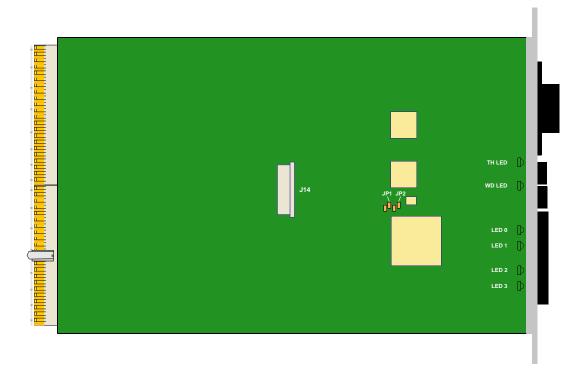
4HP CP3002 Board Layout (Bottom View)
